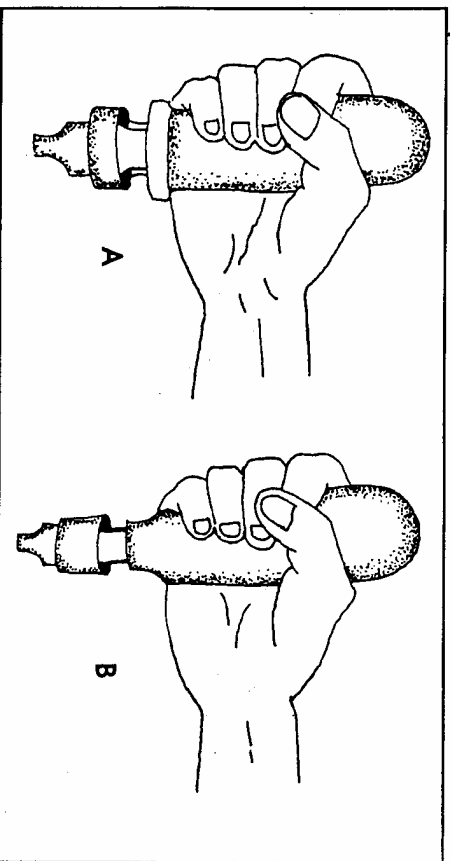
Flanging the end of an in-line tool reduces the grip strength needed to provide a given thrust by allowing that force to be supplied directly against the flange (a) rather than by friction with the tool handle (b).
